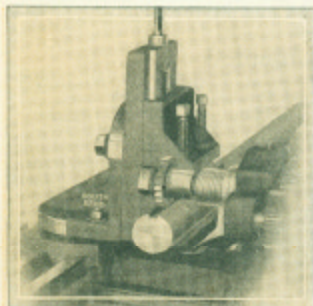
Cutting a Standard Keyway in a Long Shaft
